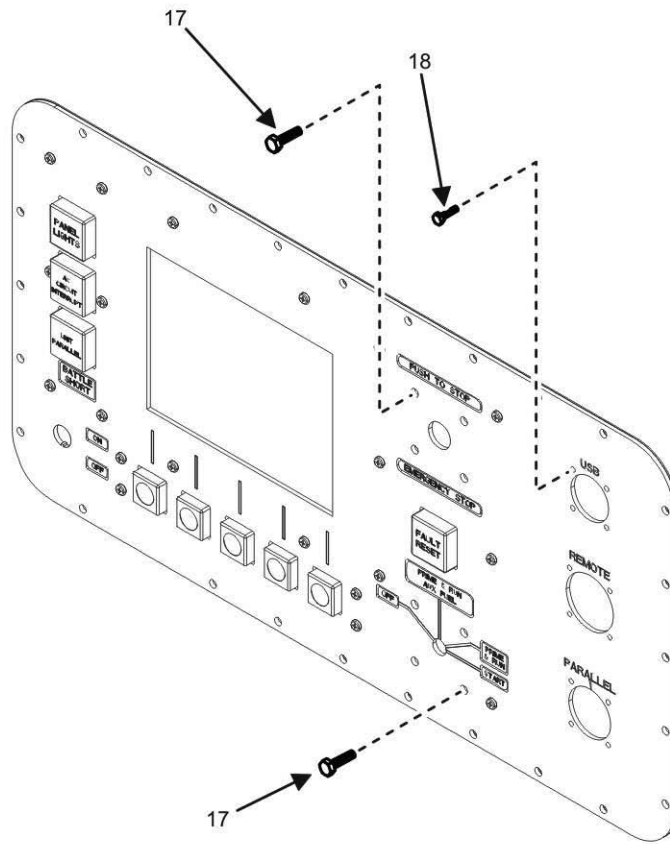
DCS Control Panel Assembly (Sheet 3 of 6).
